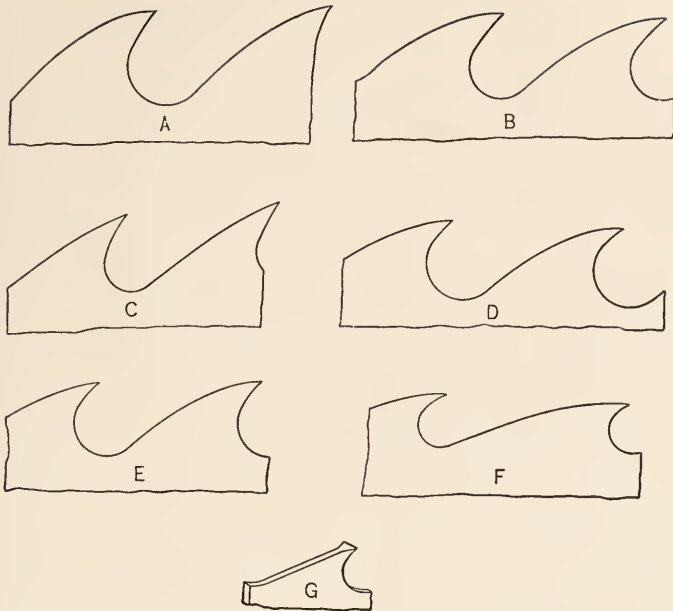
Tooth Patterns for Band Head-saws. *A.* A Tooth used on a 14-inch, 60-foot Saw cutting Douglas Fir and Western Spruce, Tooth Spacing 2 Inches, Gullet Depth 1 Inch. *B.* A Common Tooth Pattern for cutting Southern Yellow Pine, Tooth Spacing $1\frac{3}{4}$ Inches, Gullet Depth $\frac{7}{8}$ Inch. *C.* Tooth used on a 12-inch, 16-gauge Saw cutting White Pine, Norway Pine, Hemlock, and the Softer Hardwoods, Tooth Spacing $1\frac{5}{8}$ Inches, Gullet Depth $\frac{9}{16}$ Inch. *D.* A General Service Tooth Pattern used on a 14-inch, 14-gauge Saw for cutting both Softwoods and Hardwoods, Tooth Spacing $1\frac{3}{4}$ Inches, Gullet Depth $\frac{7}{8}$ Inch. *E.* Tooth Pattern used on a 14-inch, 14-gauge Saw for cutting Dirty, Seasoned, Chestnut, Oak, Ash, and Hickory, Tooth Spacing $1\frac{3}{4}$ Inches, Gullet Depth $\frac{3}{4}$ Inch. *F.* Tooth Pattern used in cutting both Domestic and Foreign Hardwoods, Tooth Spacing 2 Inches, Gullet Depth $\frac{1}{2}$ Inch. *G.* Shape of a swaged Band Saw Tooth.
